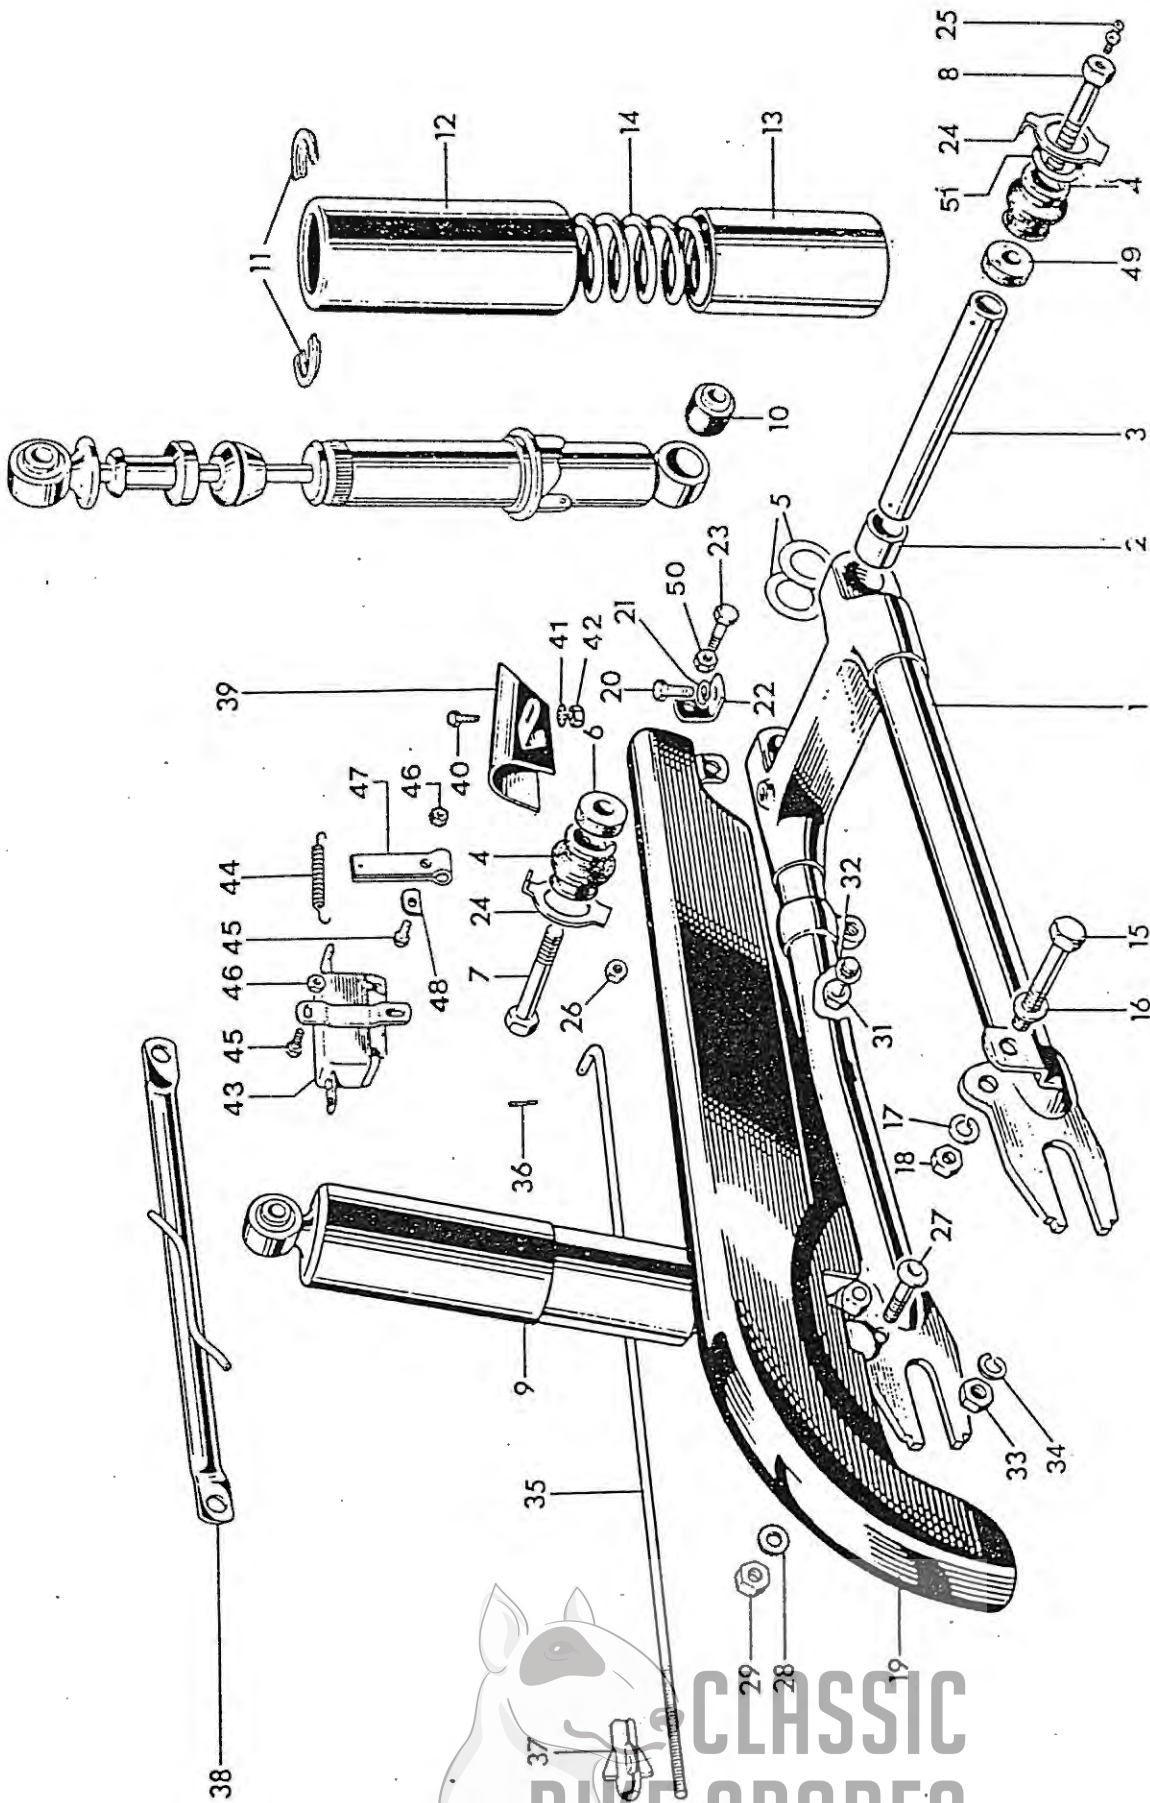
SWINGING FORK, SUSPENSION UNITS AND CHAINGUARD
